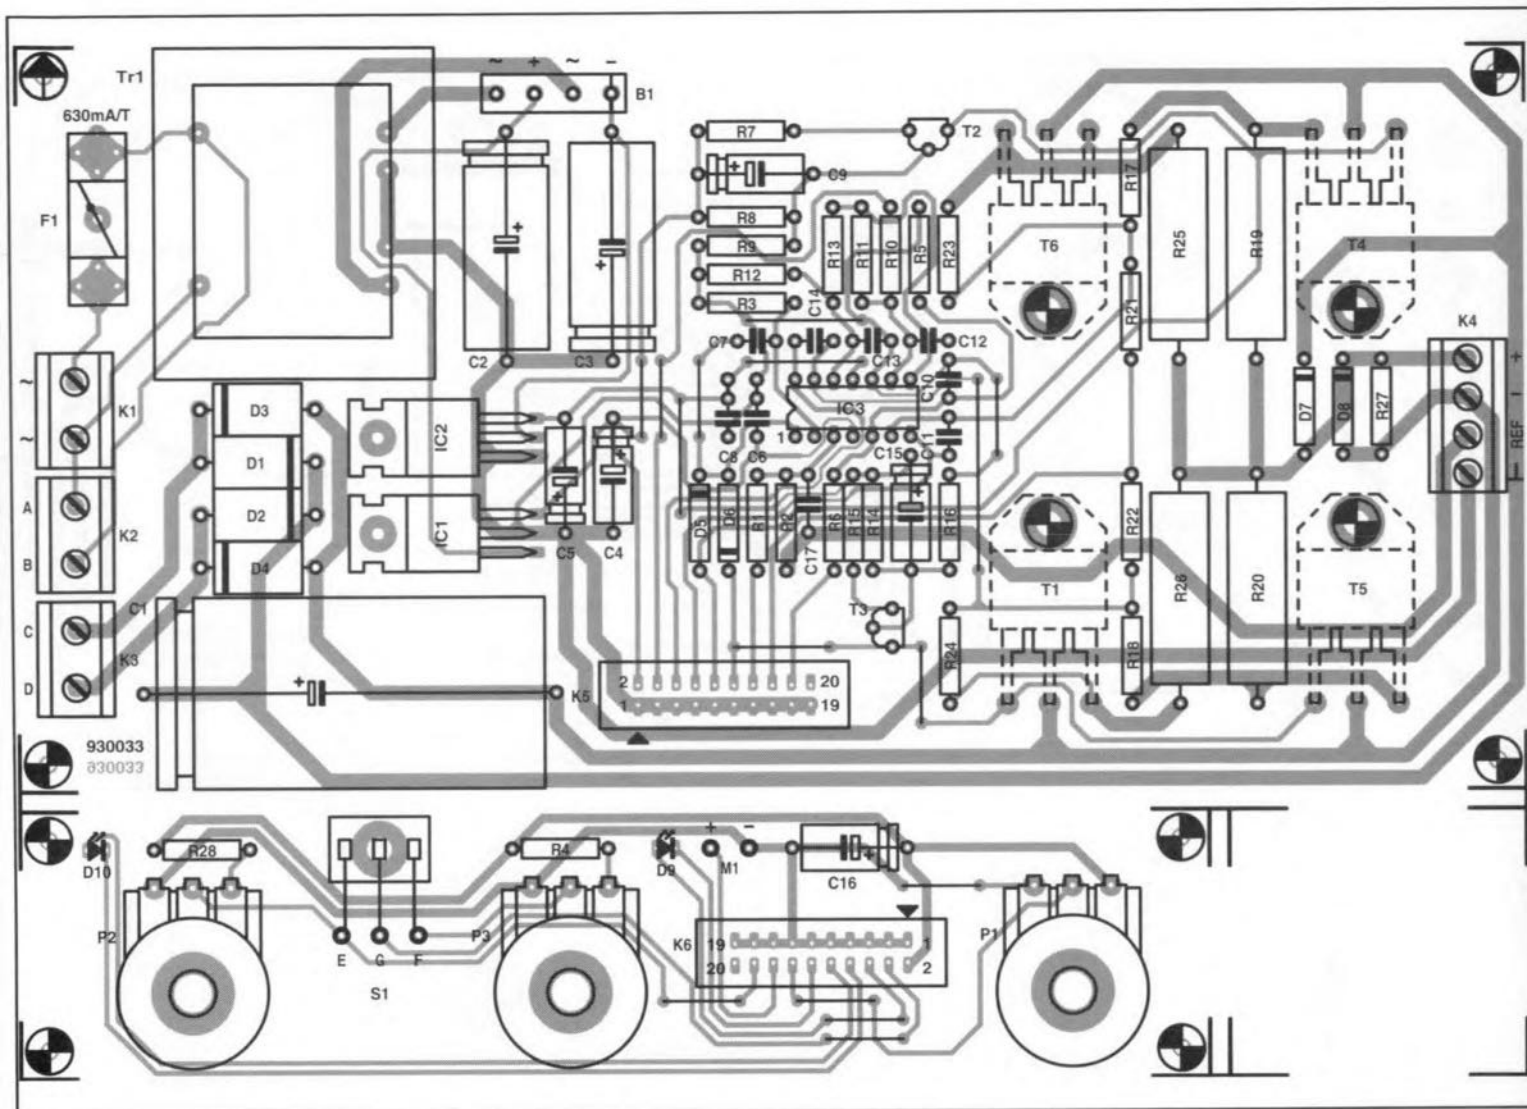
Printed-circuit board for the power supply unit – component layout.
